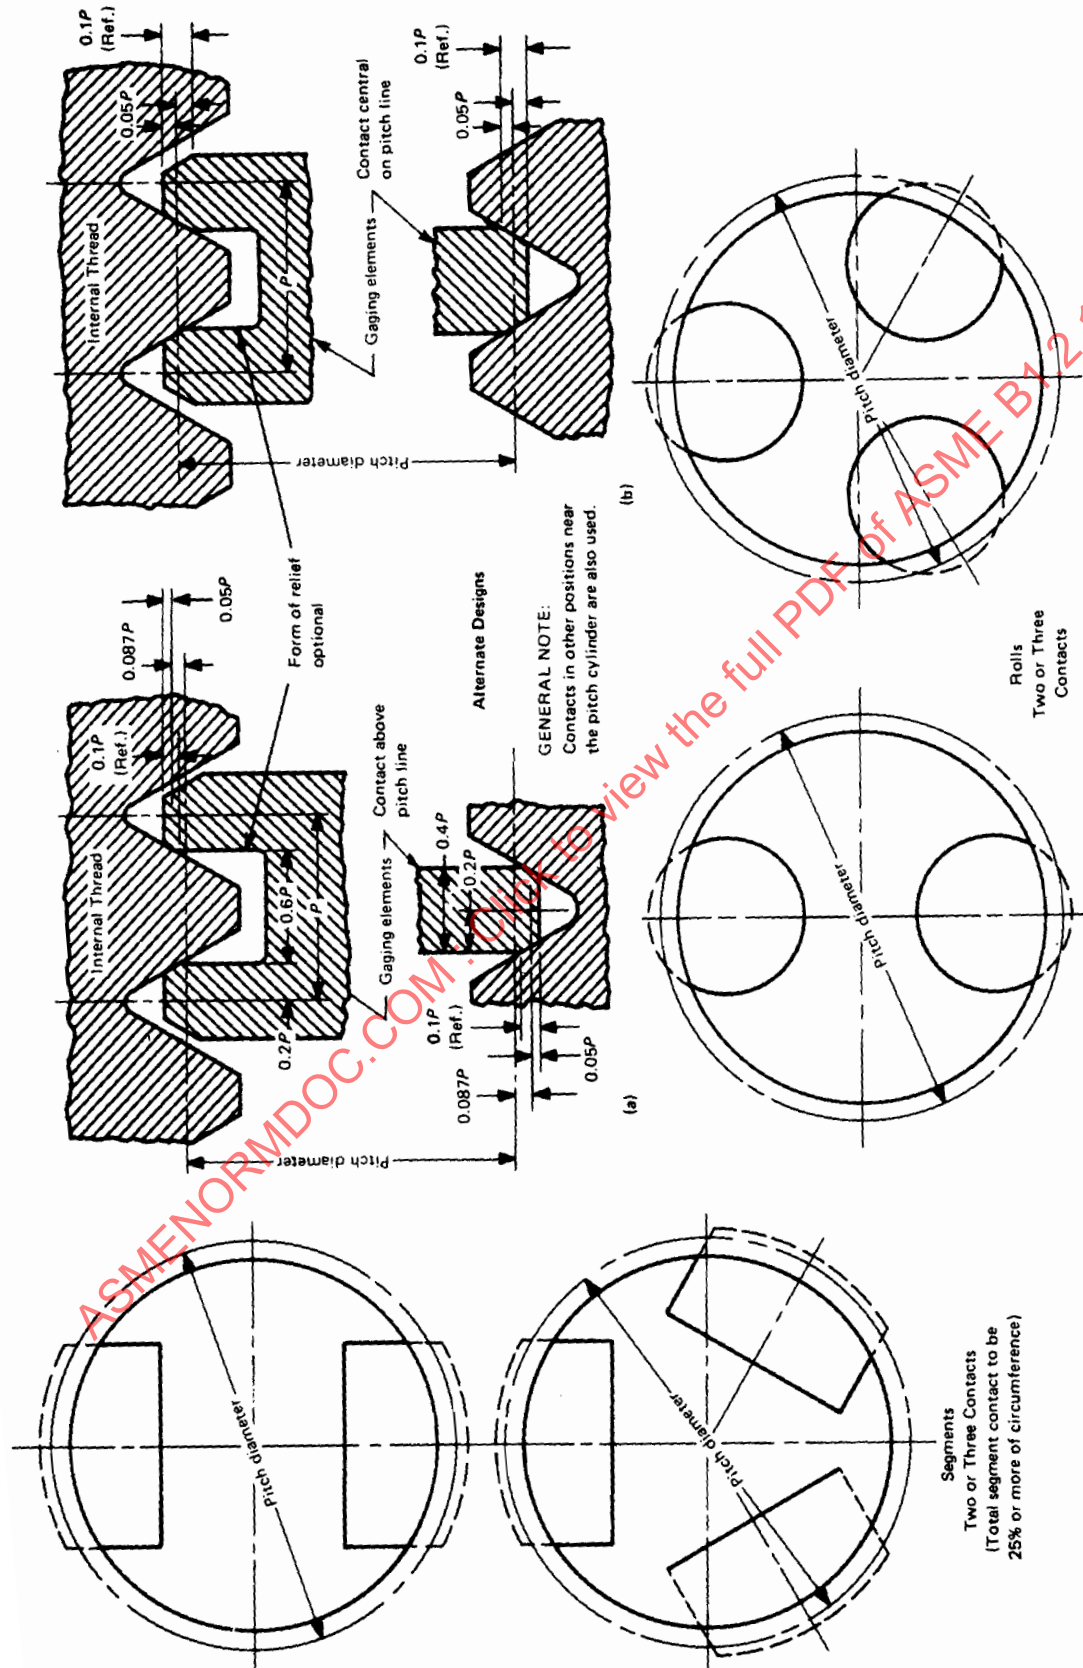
INDICATING THREAD GAGES — MINIMUM-MATERIAL PITCH DIAMETER
